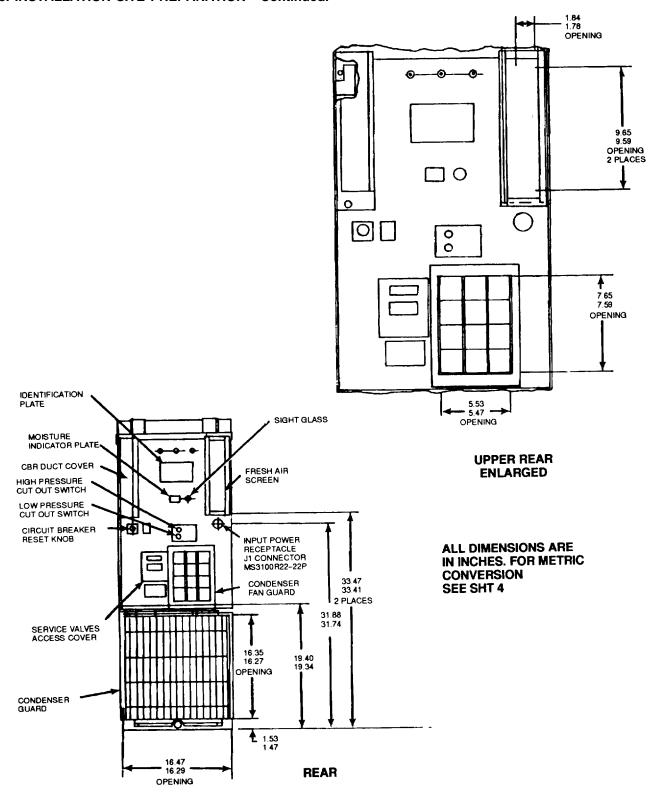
Installation Dimensions (Sheet 2 of 4)
